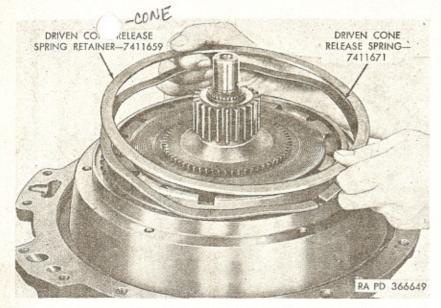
Removing or installing reduction unit driven cone release spring and retainer (303M).
